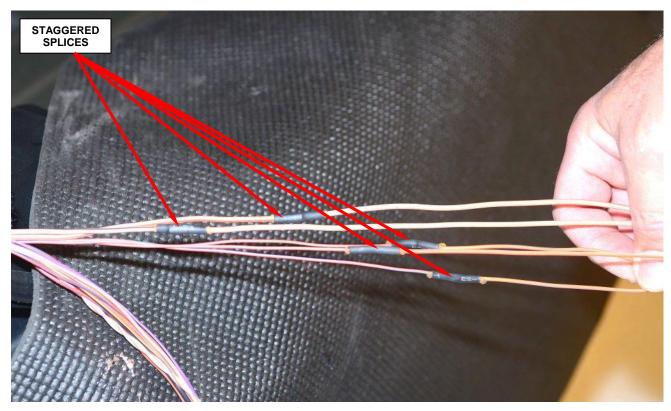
Correctly Spliced Wires (Staggered/Crimped/Soldered/Heat Shrink)
